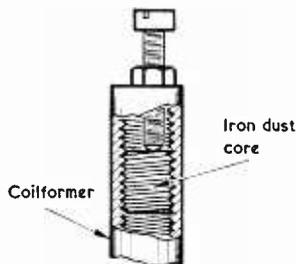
Illustrating a method of determining the position of an iron-dust core in a coil former
